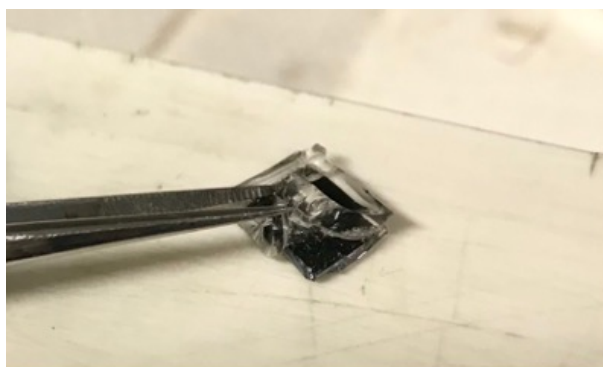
Photograph of PDMS fracturing when demolding, 03/03/2023
